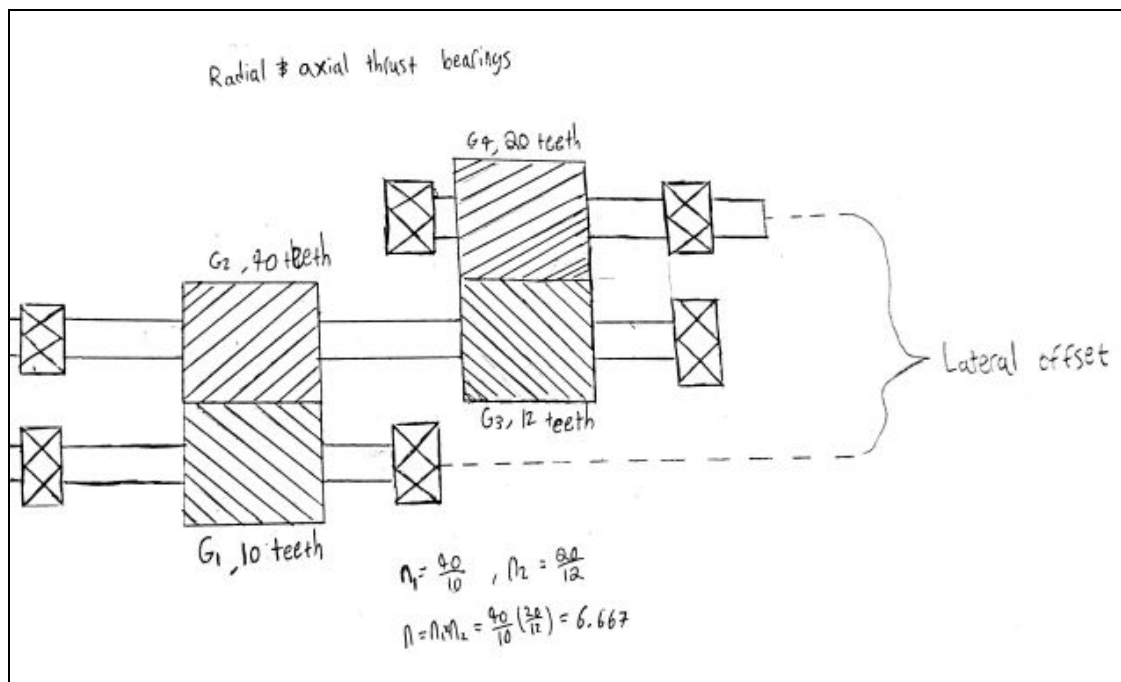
Solution 2 - Distinguished by Helical Gears and Parallel Shafts
